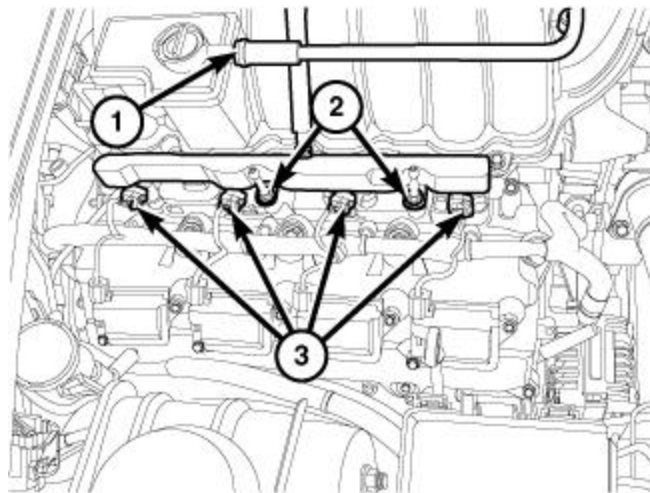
PCV Hose, Right Fuel Rail Retaining Bolts & Right Side Fuel Injector Electrical Connectors
